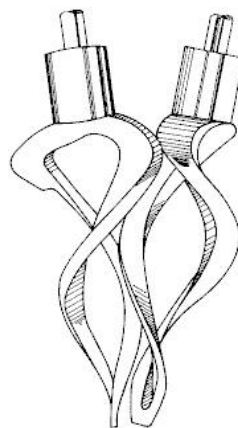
DOUBLE HELICONE IMPELLER [73]
